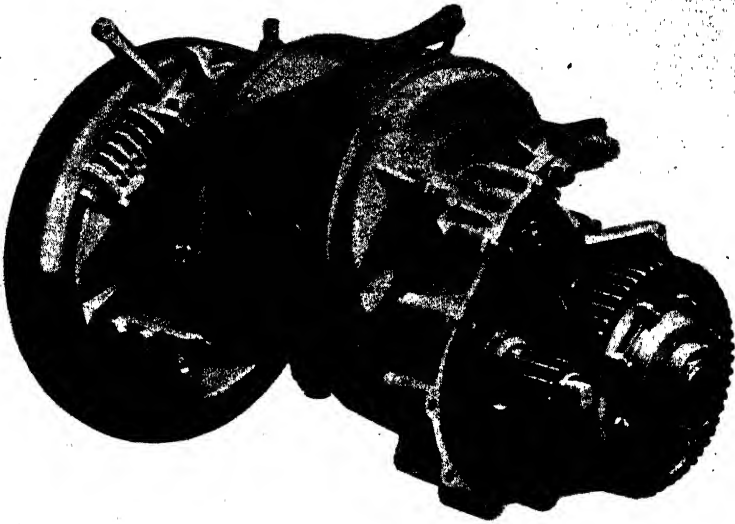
TRUCK DRIVING UNIT WITH HALF OF GEAR COVER REMOVED
